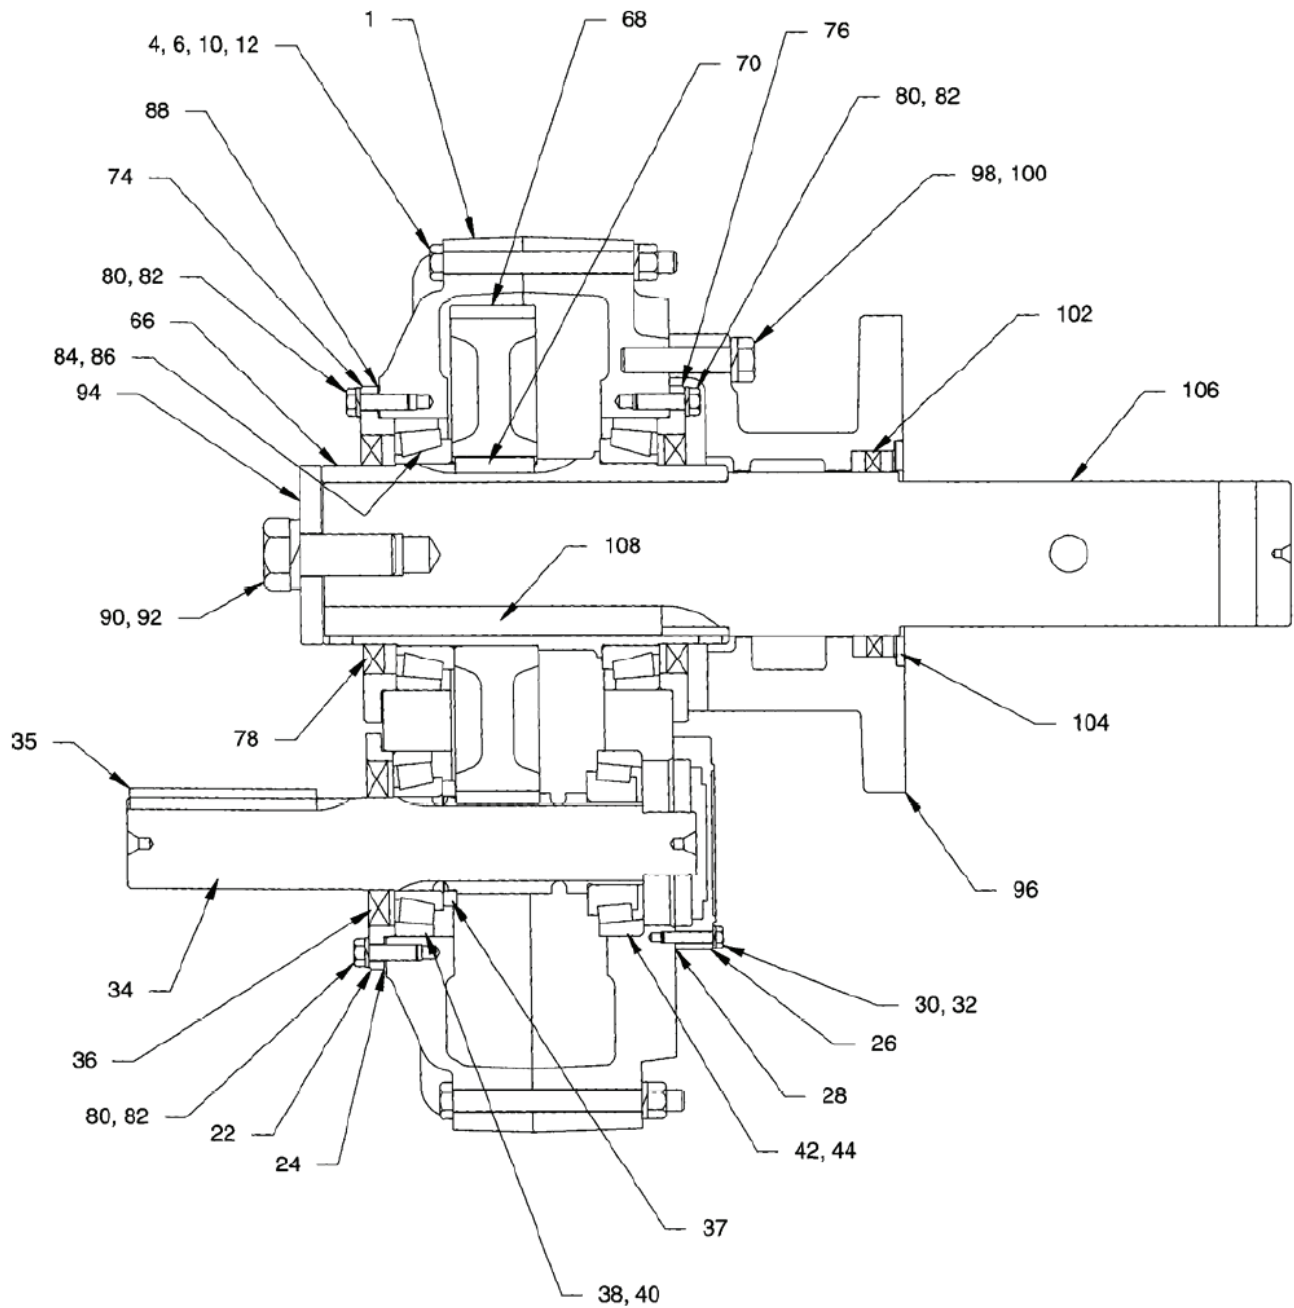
Parts for SCXT605 - SCXT705 Screw Conveyor Drive
